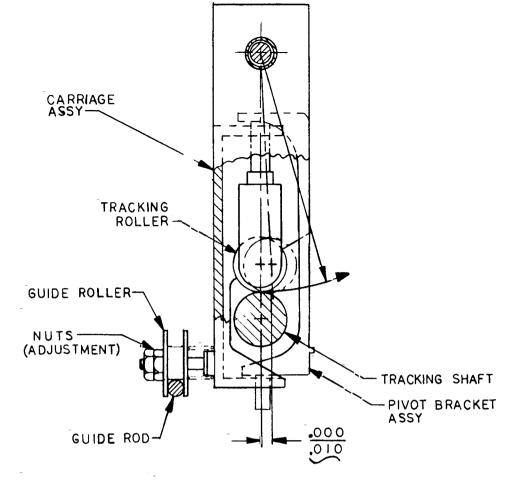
CARRIAGE POSITION ADJUSTMENT
